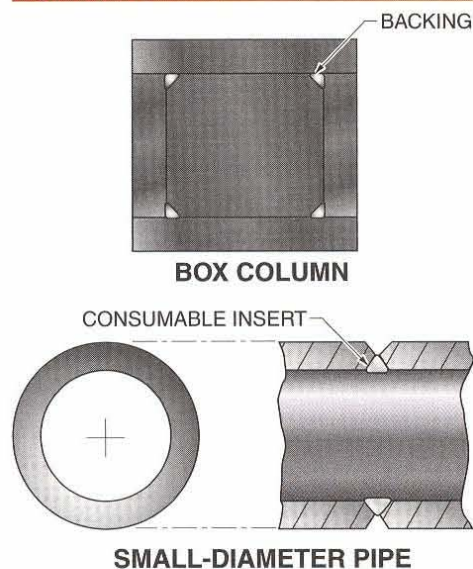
Welder accessibility is a key consideration in creating a sound joint. If a joint is inaccessible, backing material or consumable inserts can be used to ensure complete penetration.
